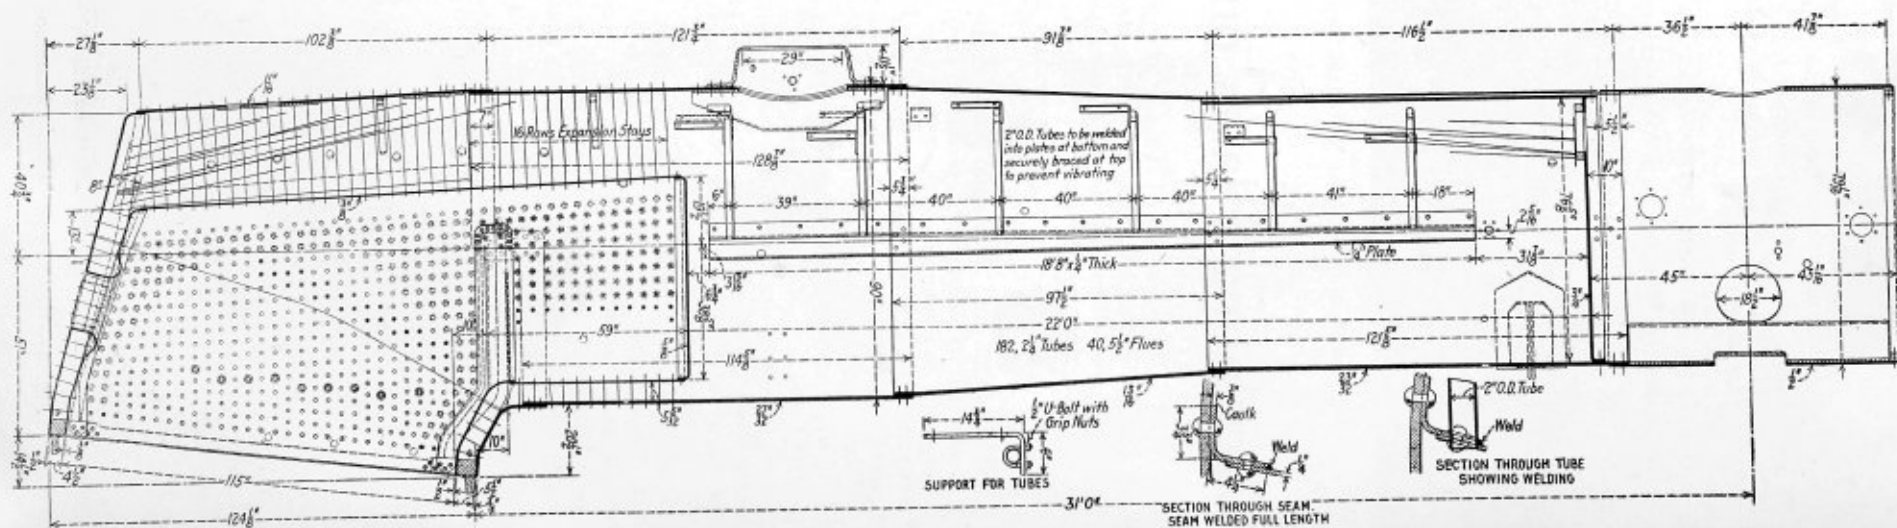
Sectional View of Mountain Type Locomotive Boiler, Showing the Harter Circulating Plate and Installation Details
